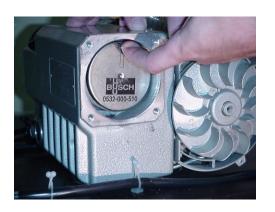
Remove the 4 hex head cap screws holding the exhaust silencer in place
